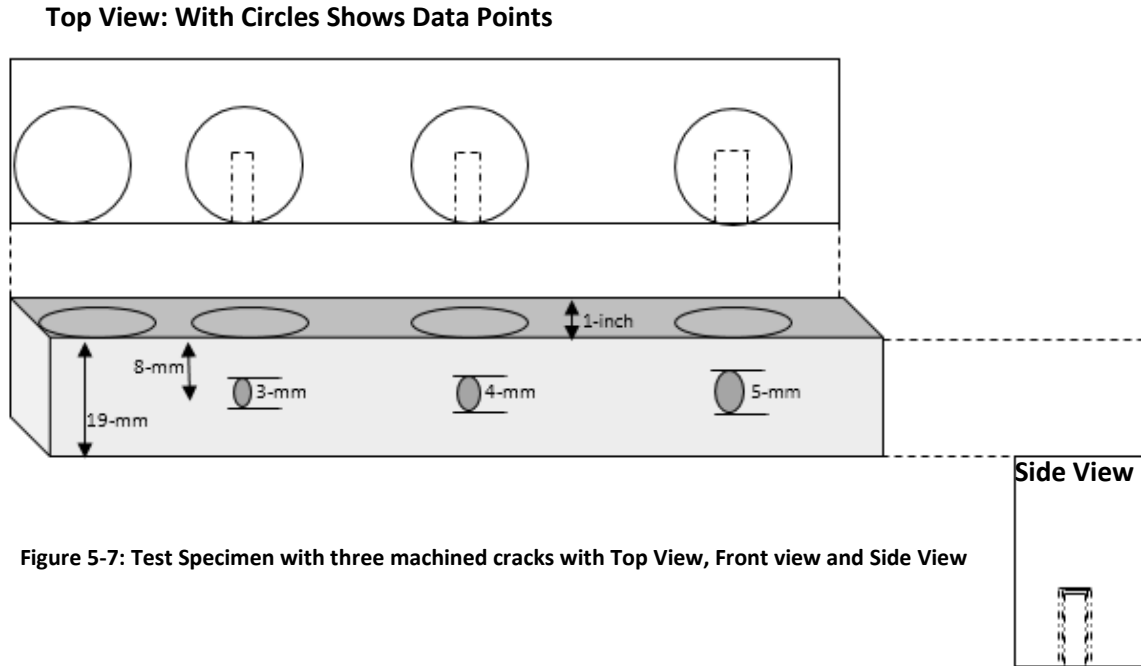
Test Specimen with three machined cracks with Top View, Front view and Side View
